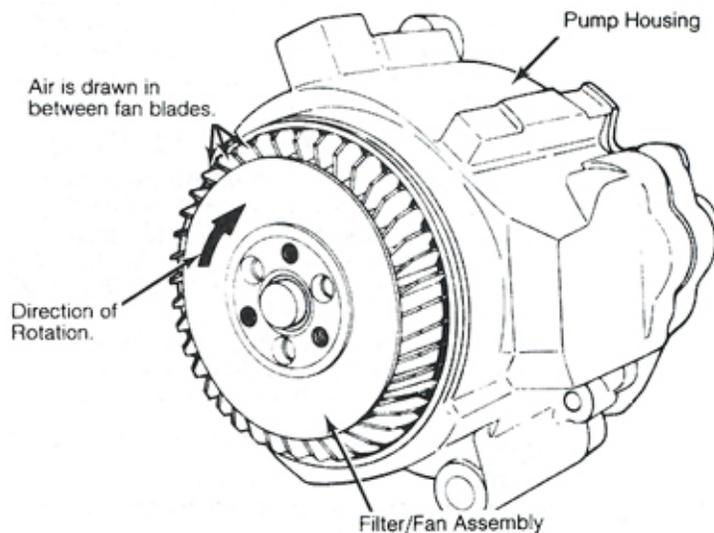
Air Pump with Centrifugal Filter/Fan Assembly
